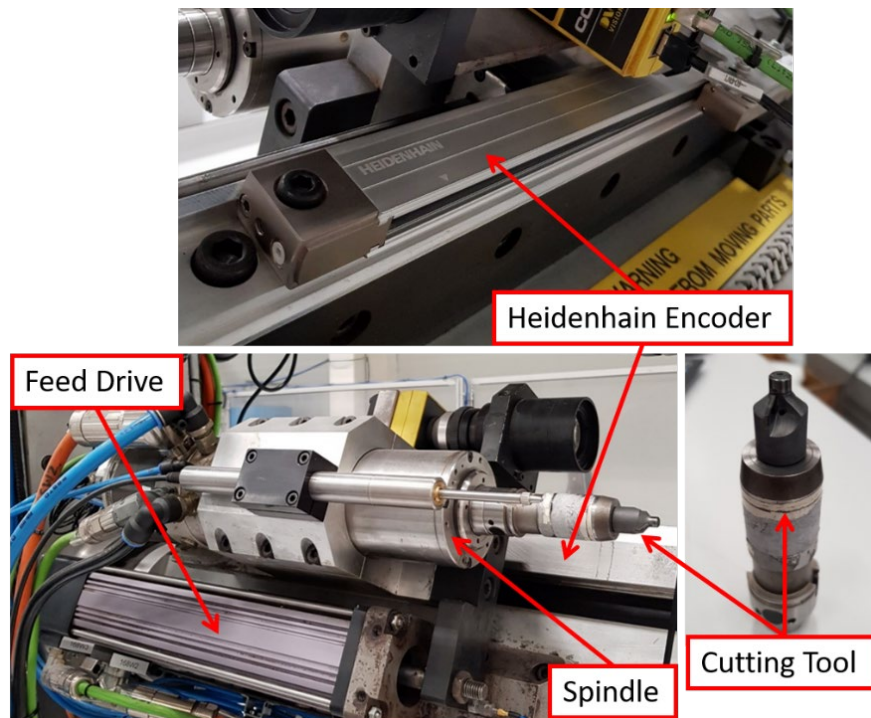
Cutting Unit: Feed Drive, Spindle, Cutting Tool and Heidenhain Encoder.
